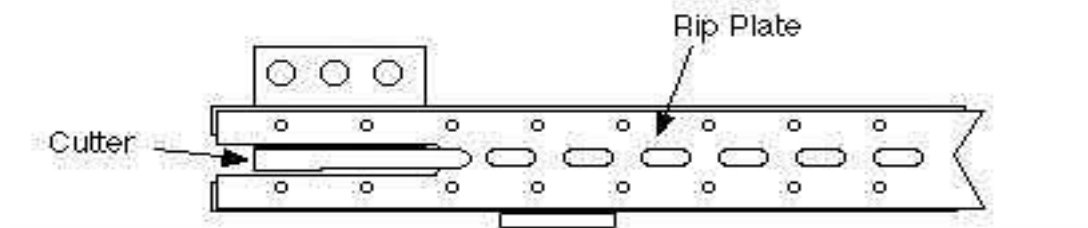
Cutter Engaged in Slot (parts removed for clarity)
